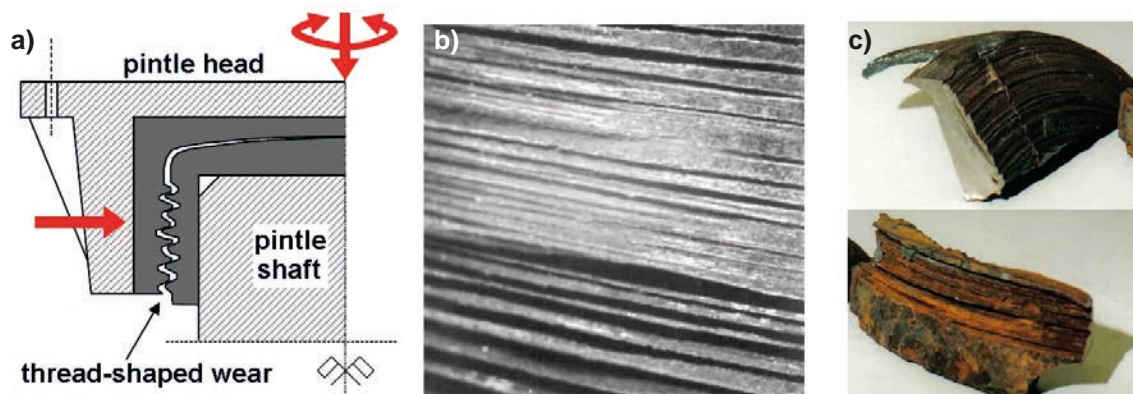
Thread-shaped wear in gate bottom pintle [7])
